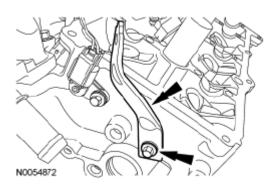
Locating Upper Intake Manifold Bracket Bolt Courtesy of FORD MOTOR CO.
